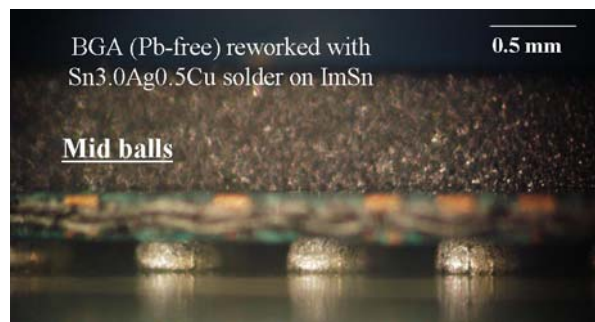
BGA solder balls on the midsection show higher solder-joint height than edge (corner) balls
